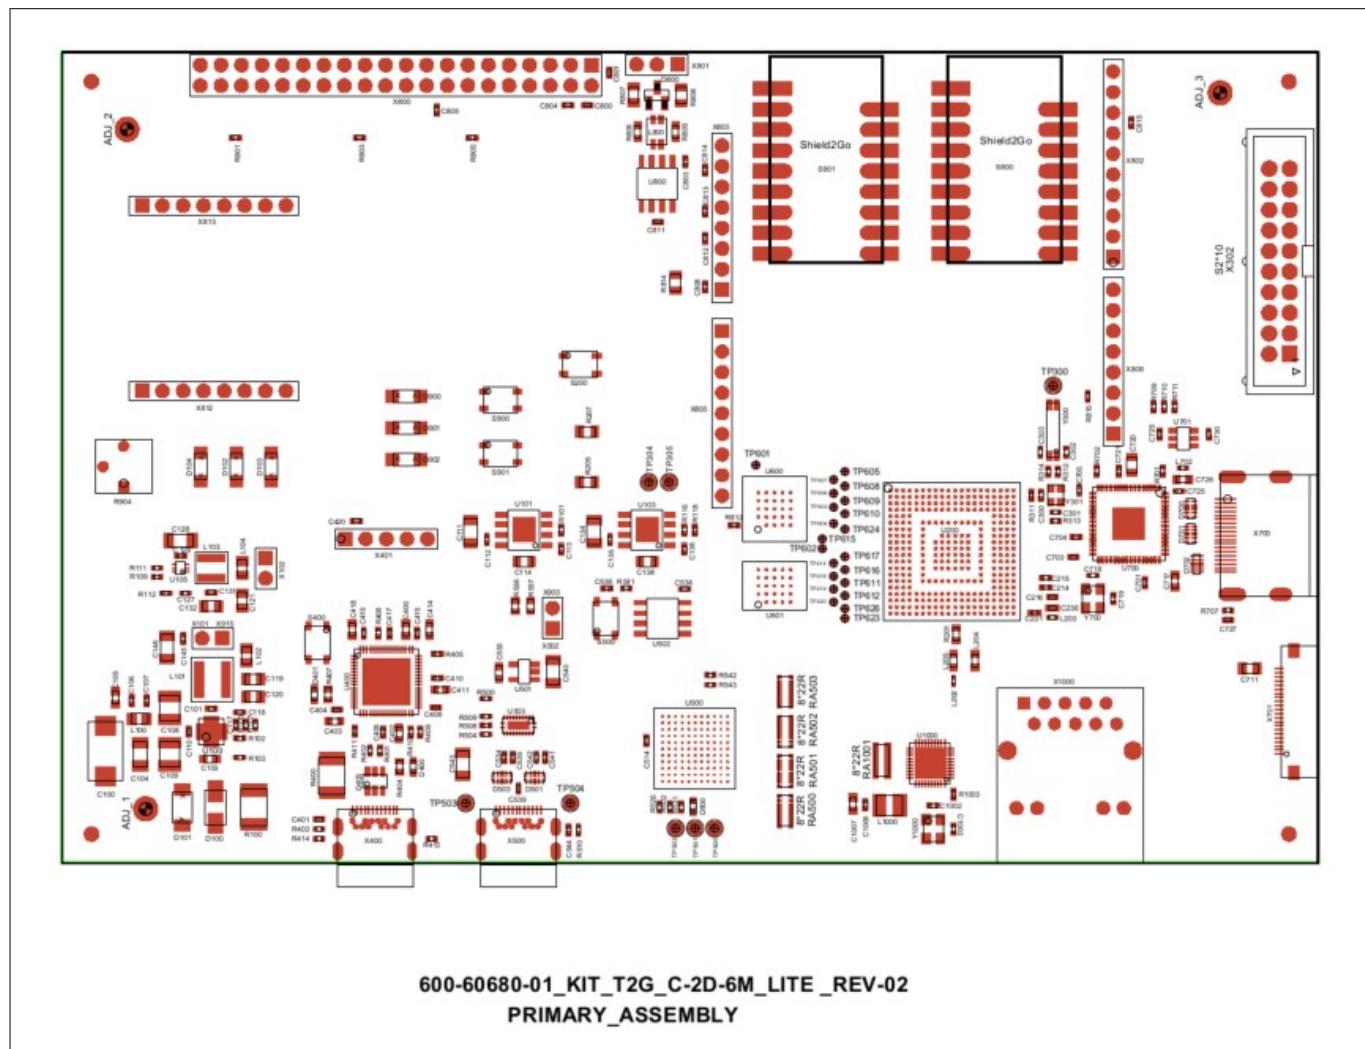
Primary assembly drawing of the Cluster 6M Lite Kit
